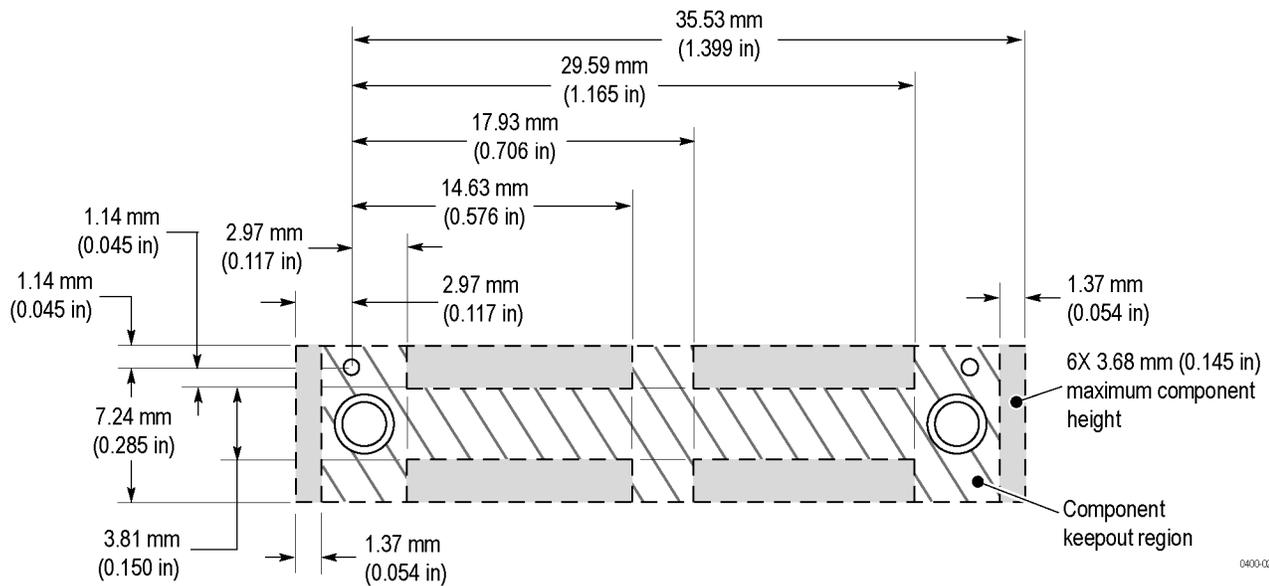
x8 midbus footprint dimension and keep-out area (back side of circuit board)
